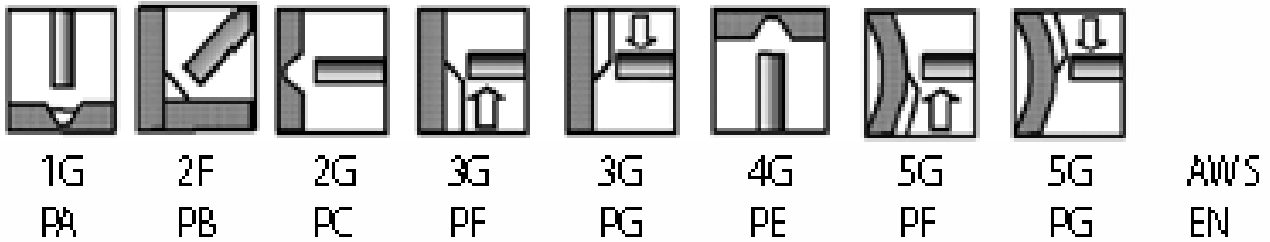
Recommended welding positions for Safdual Zn flux cored wire [9]
